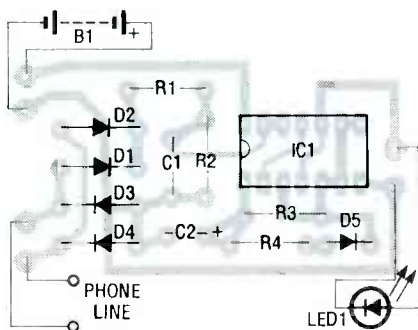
THE PARTS PLACEMENT DIAGRAM of the Phone Sentry. You can mount LED1 in several ways, depending on how you mount the PC board.
